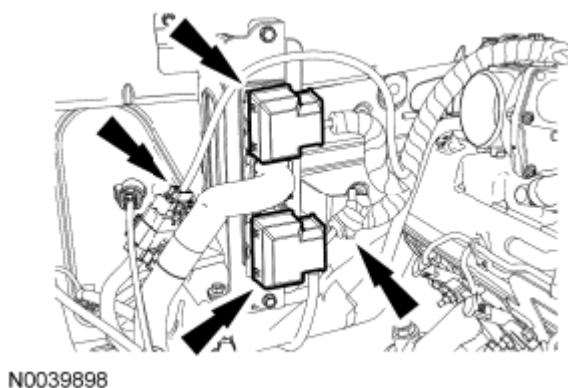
Locating Wiring Harness Electrical Connector And Engine Wiring Harness-To-PCM Electrical Connectors
